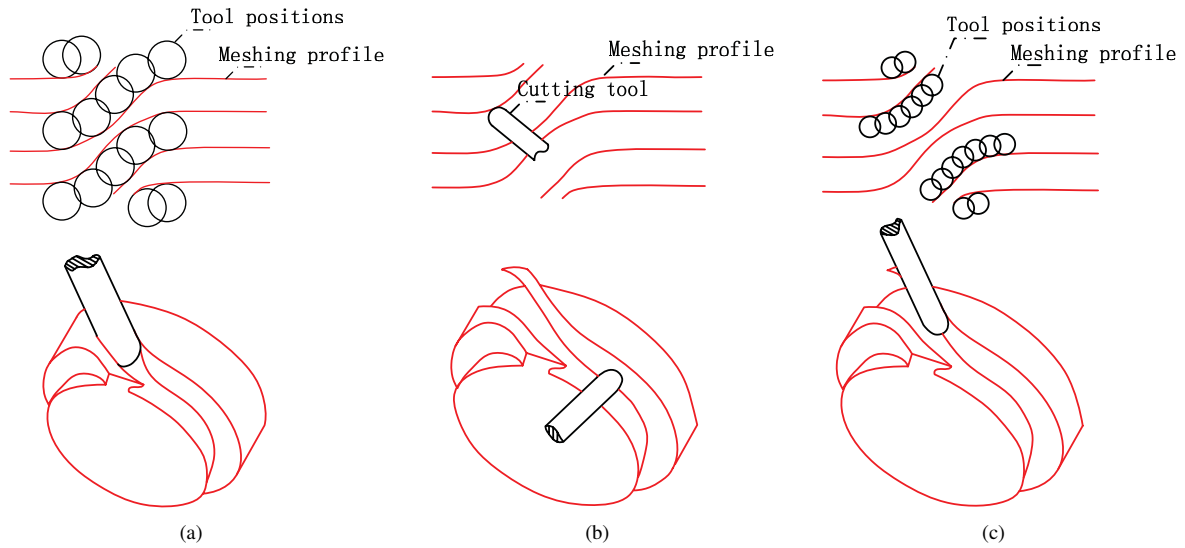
(a) Equivalent processing, (b) 5-axis point-milling, (c) 5-axis flank milling
